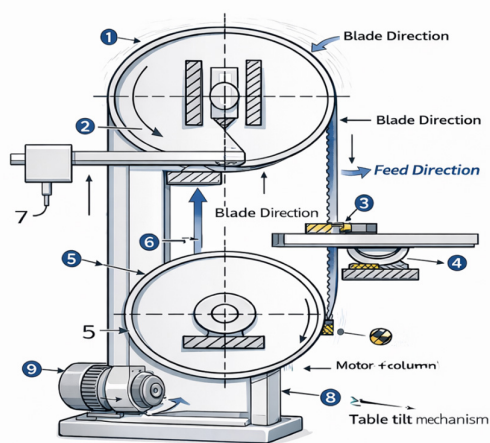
Schematic cross-sectional view of the band saw used for cutting bamboo logs into core strips, illustrating the continuous blade path and feed direction.
